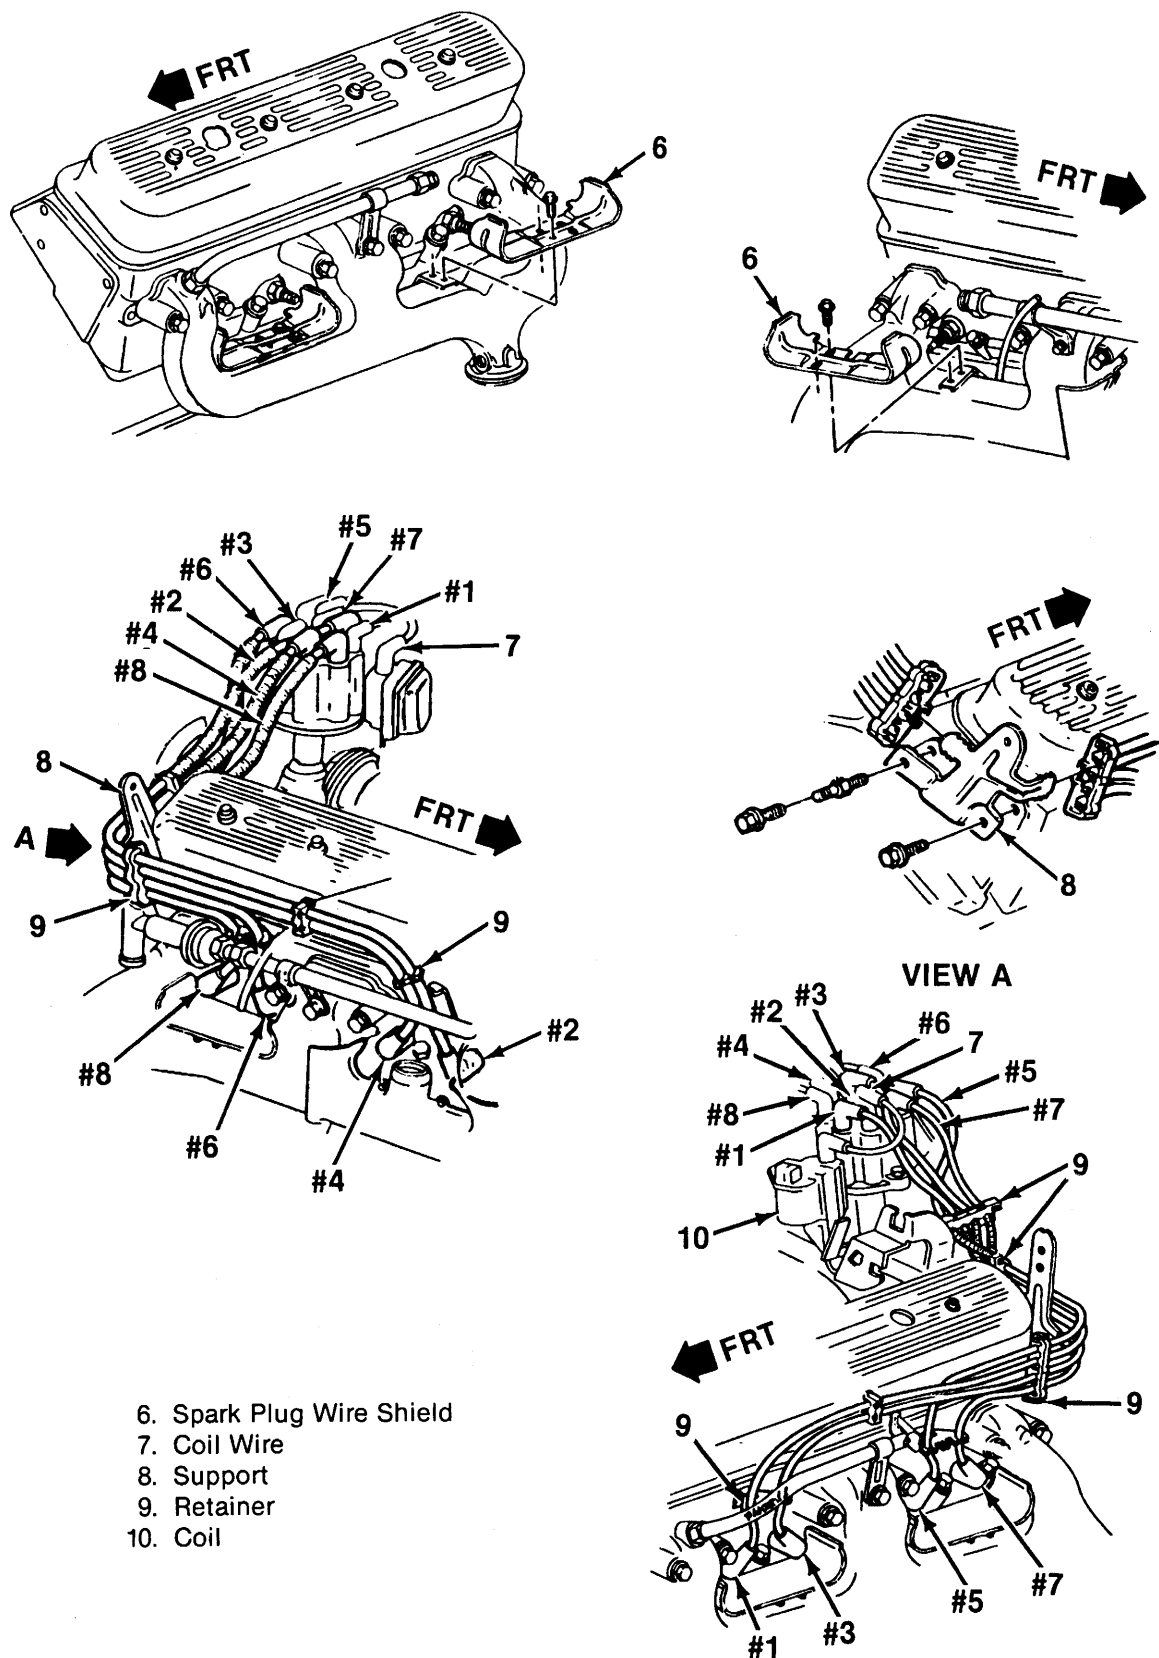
Spark Plug Wire Routing (5.0L and 5.7L Engines)
